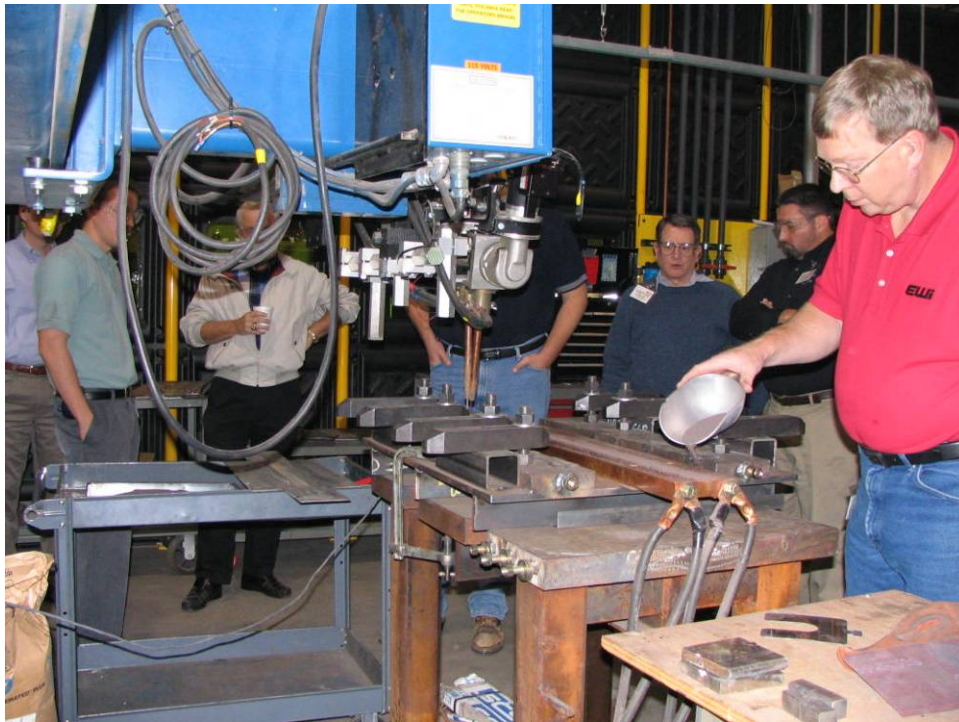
Loading Flux into the Improved FCB Before Welding
